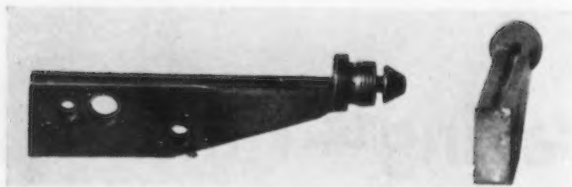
Tack welding holds the tip to the shank of this electrode holder while being furnace brazed.
